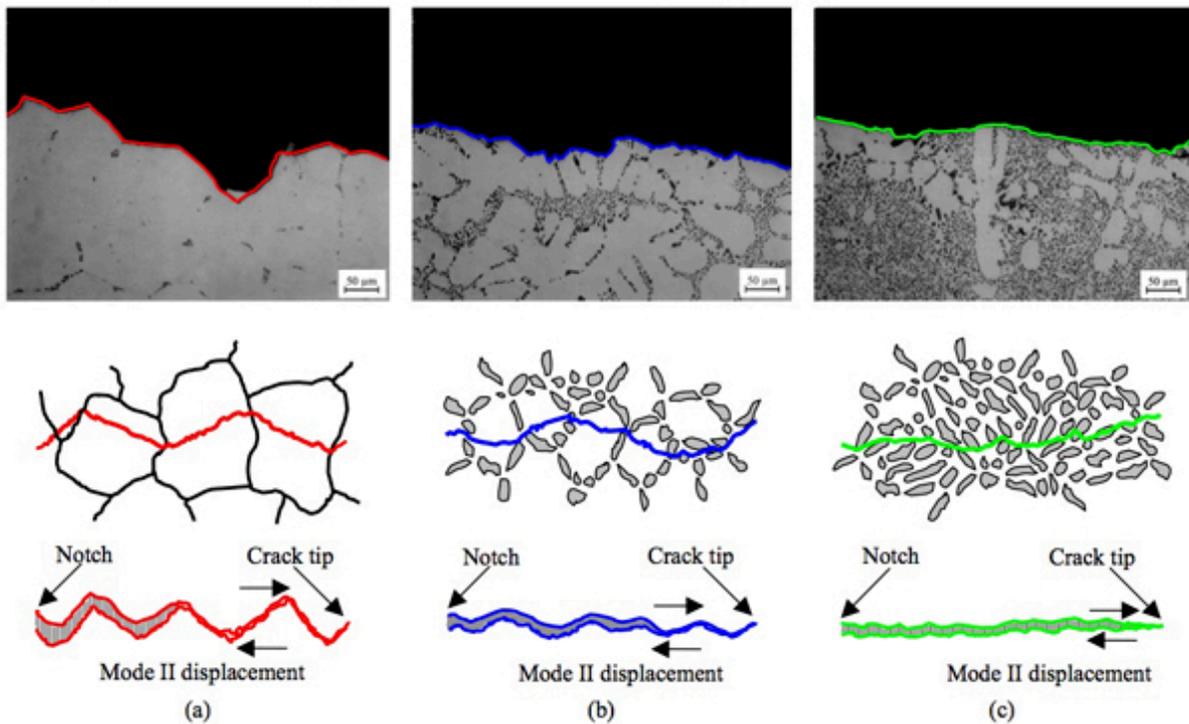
Crack path deflection patterns for three Al-Si-Mg alloys: (a) 1%Si; (b) 7%Si; (c) 13%Si (fractographic observations - top and crack path models - bottom); mode II displacement is also contributing to closure.
